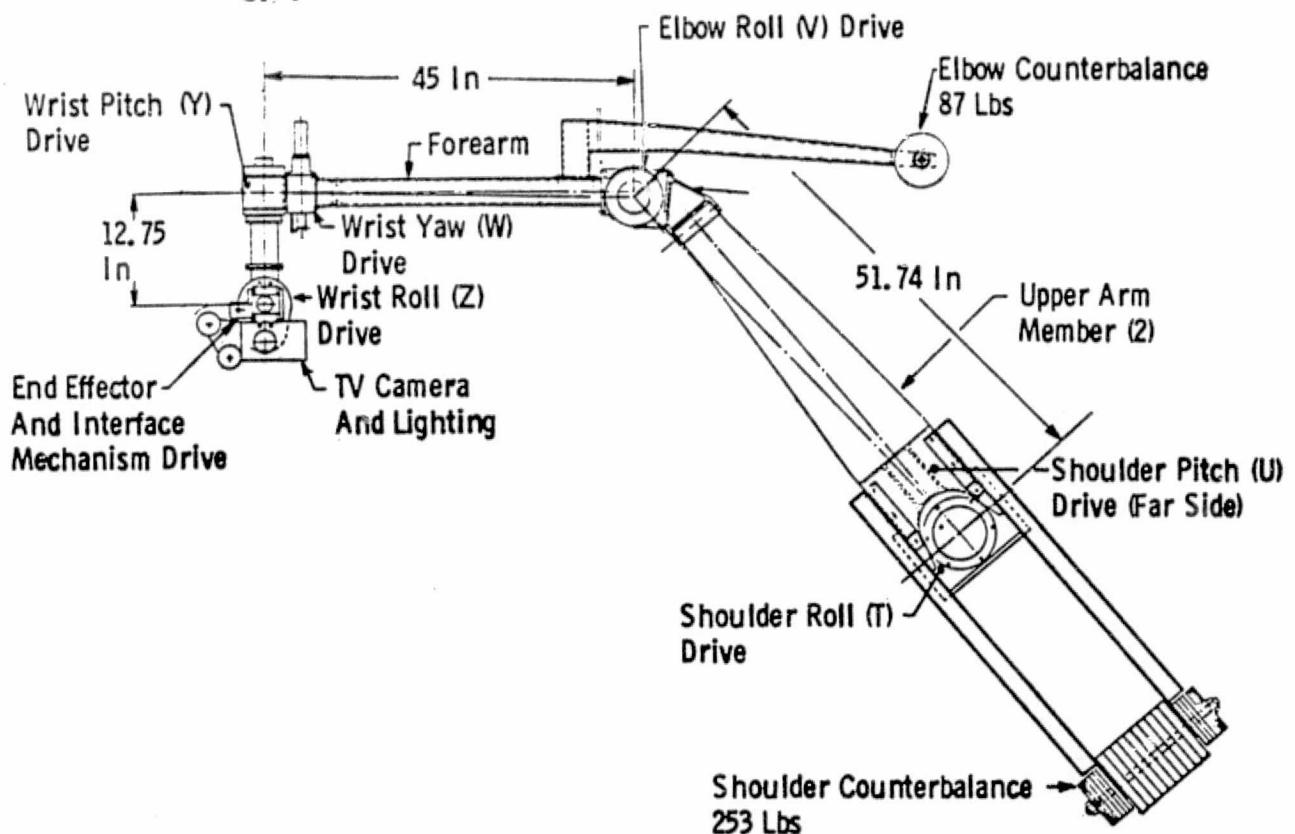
The ETU Servicer Mechanism - Top View
